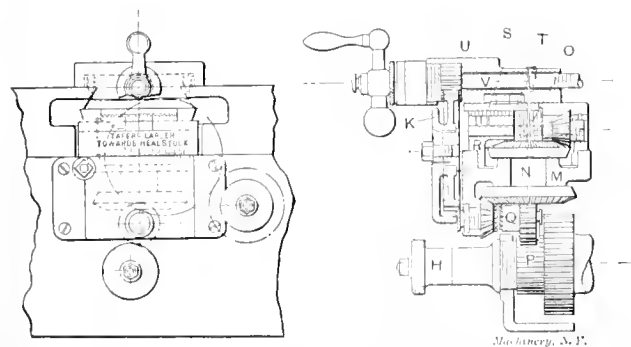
An Ingenious Taper Attachment operated by the Apron Gearing.
